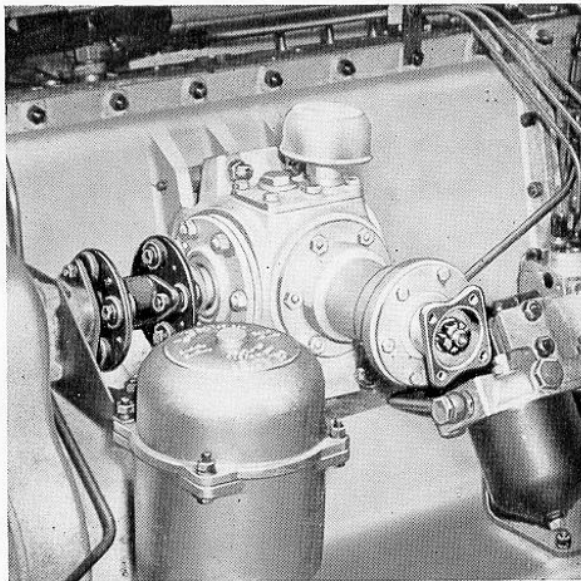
RIGHT-ANGLE-DRIVE IN POSITION
